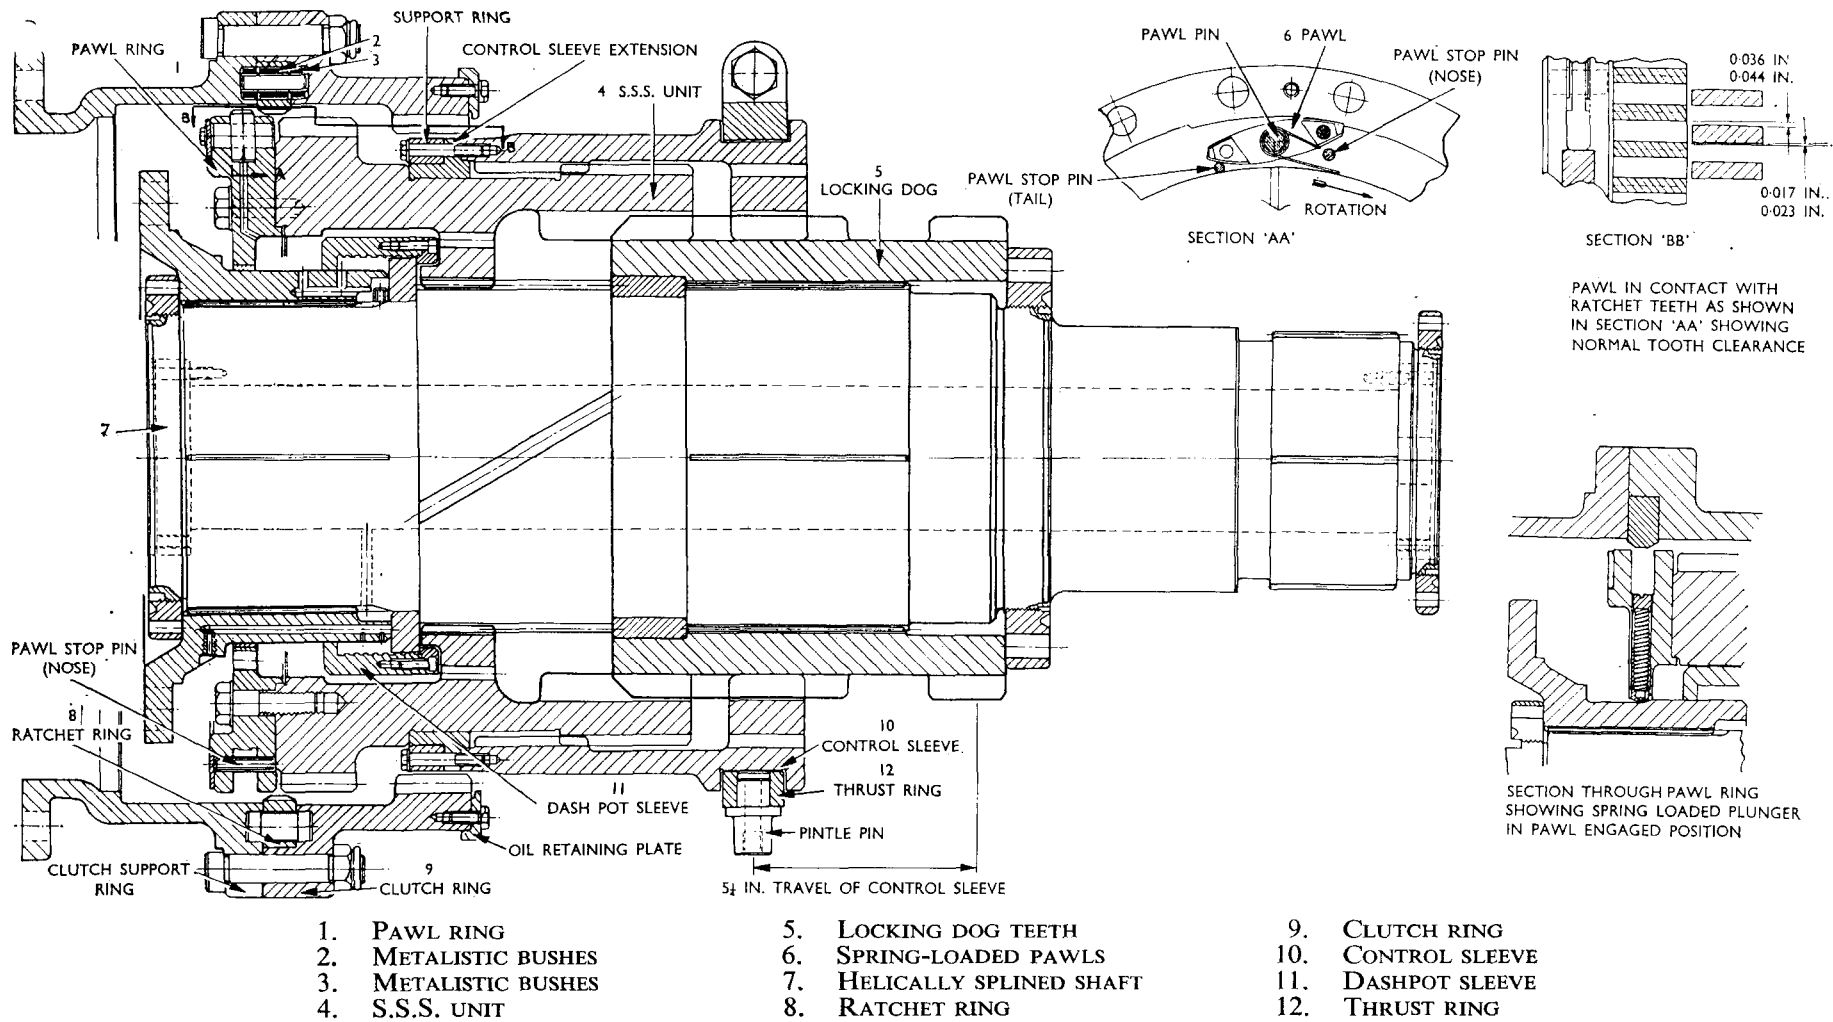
ASSEMBLY OF MAIN SYNCHRONIZING CLUTCH—PORT
